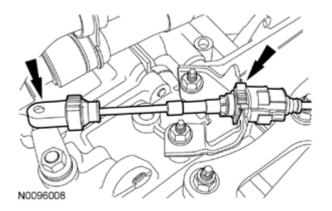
Locating Shift Cable Of Transaxle Manual Lever Courtesy of FORD MOTOR CO.
